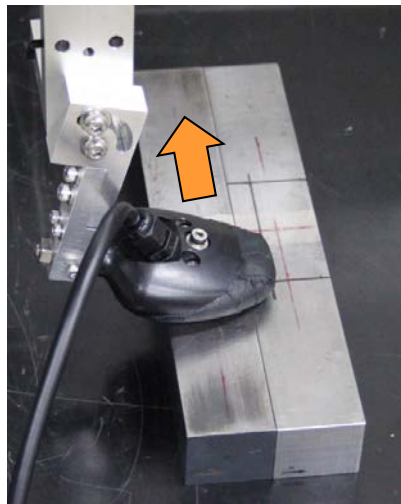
Wire Encoder Attached to Pipe Test Blocks
